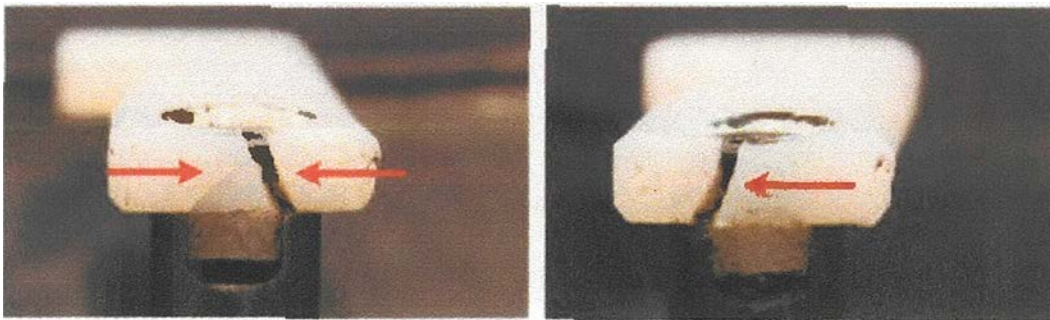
Cracked Safety Catches in the W76 Aft Disassembly Fixture, 076-2-0382 [26].
